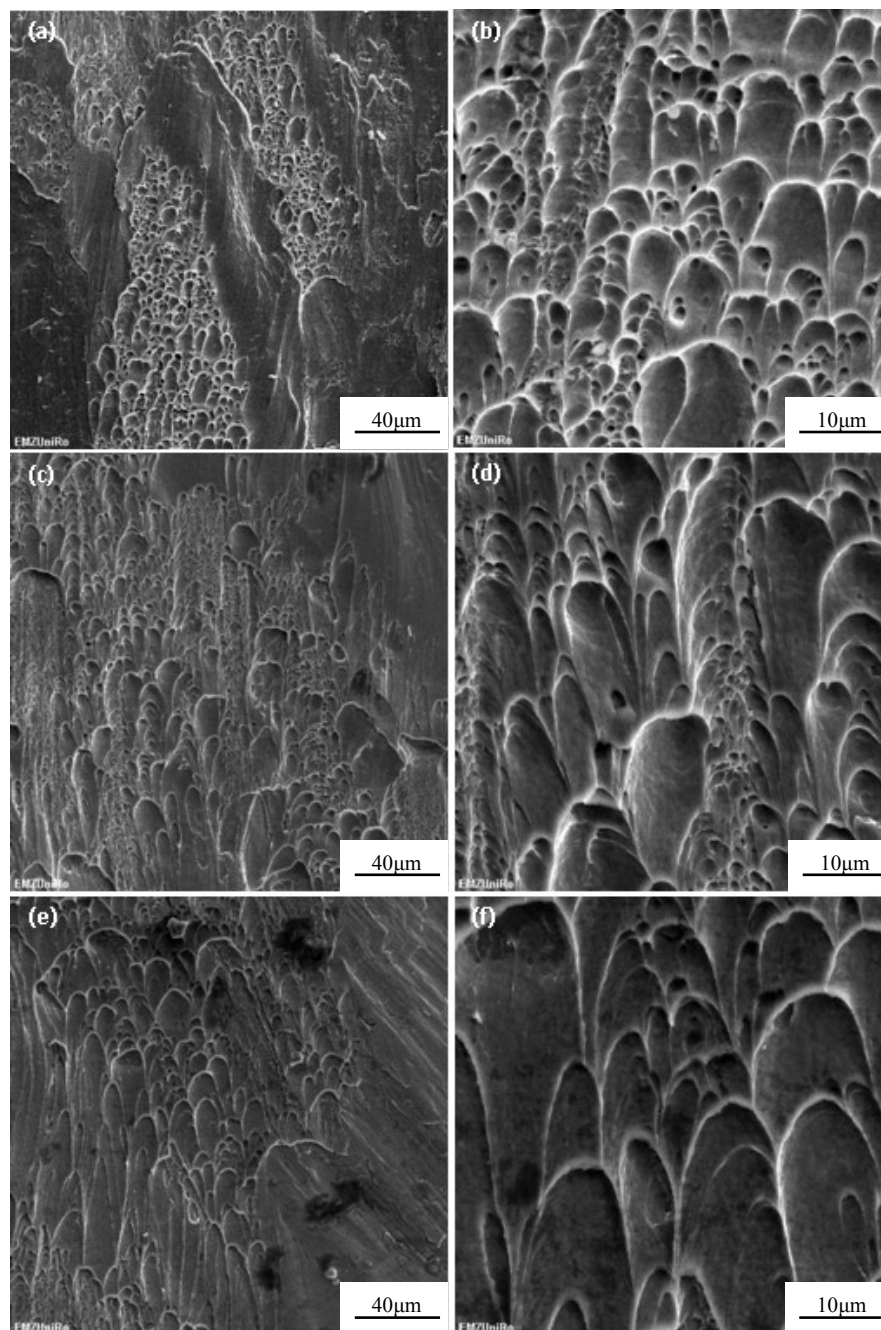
Fracture surface of the Ti-6Al-4V specimen sintered at 850°C with a cooling rate of 1.55°C/s (a) and (b) the enlarged image of the dimple region in (a); Fracture surface of the specimen sintered at 850°C with a cooling rate of 3.54°C/s (c) and (d). (e) and (f) are the fracture images of specimen sintered at 850°C with a cooling rate of 4.68°C/s. Presence of dimples characteristic of ductile fracture demonstrates a highly ductile fracture in Ti-6Al-4V alloy.
